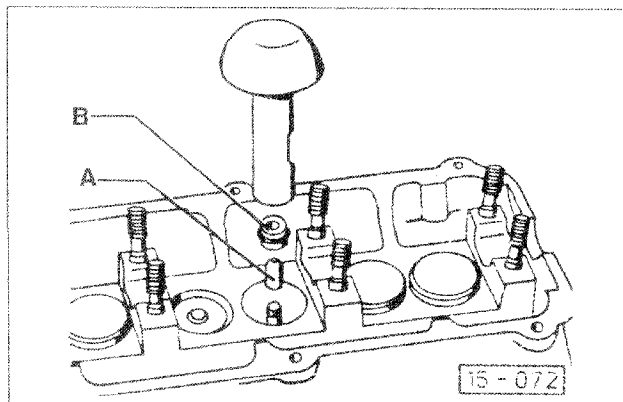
Protective cap A, new valve stem oil seal B, and installing tool.
